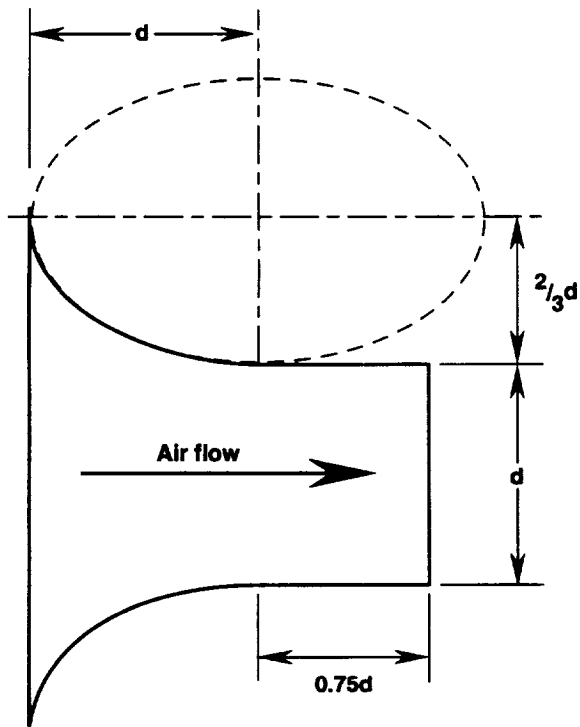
American Society of Mechanical Engineers (ASME) long-radius nozzle definition.
